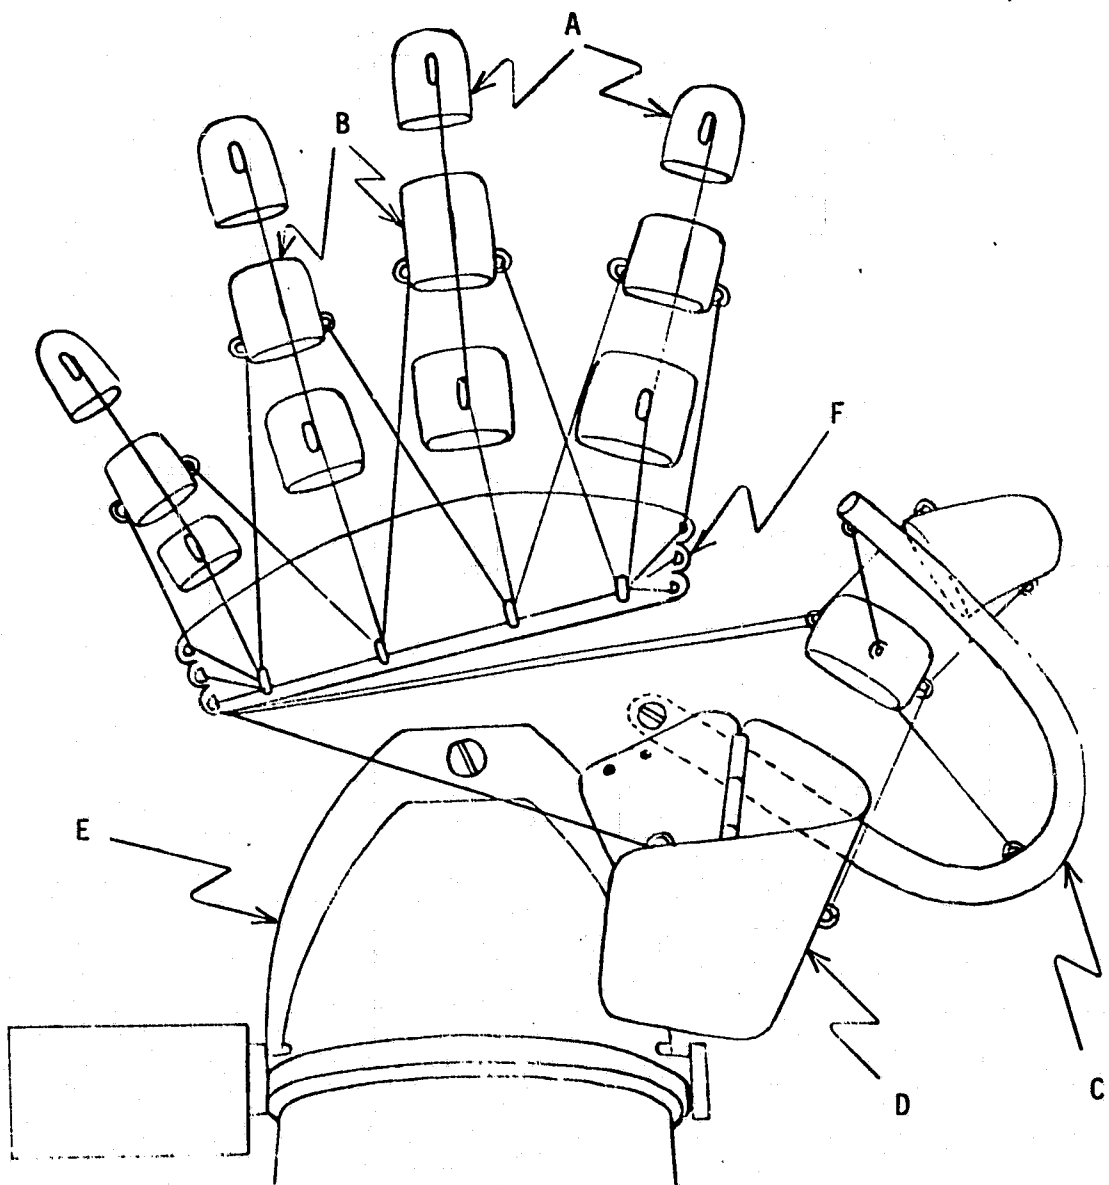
MASTER HAND CONTROLLER (BOTTOM VIEW)
